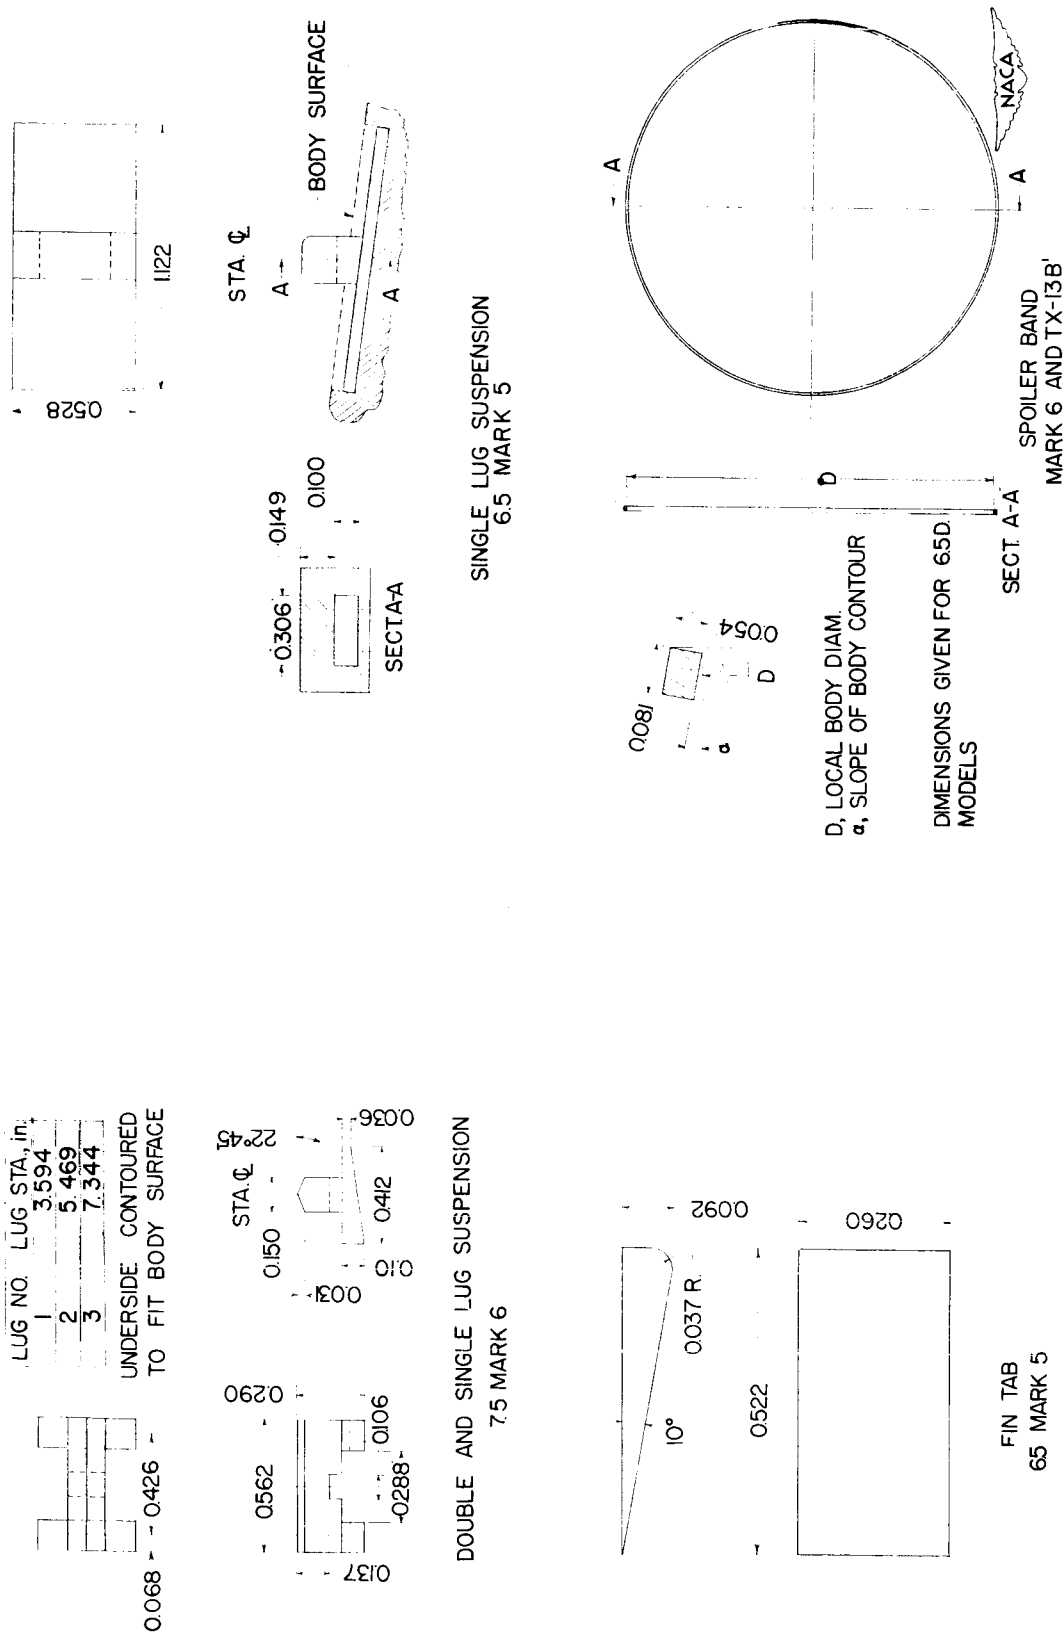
Details of accessory parts used with the models. All dimensions are in inches.
